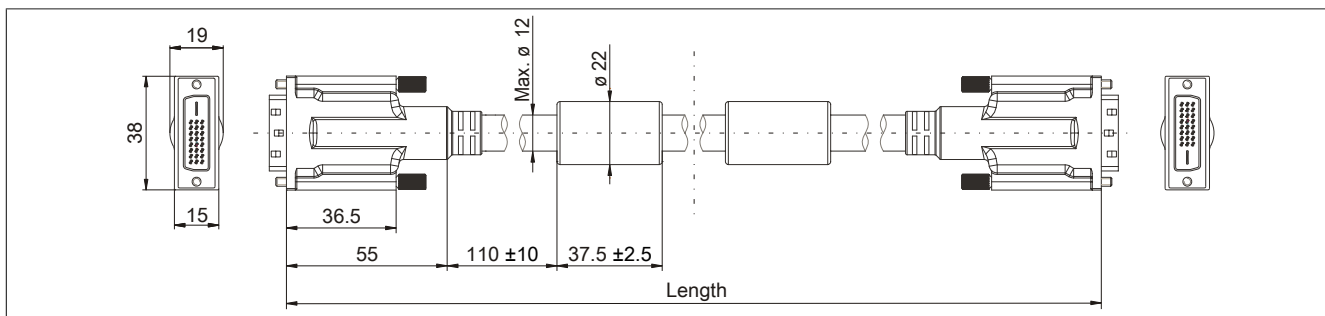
5CASDL.0xxx-03 ≤Rev. D0 - Dimensions
